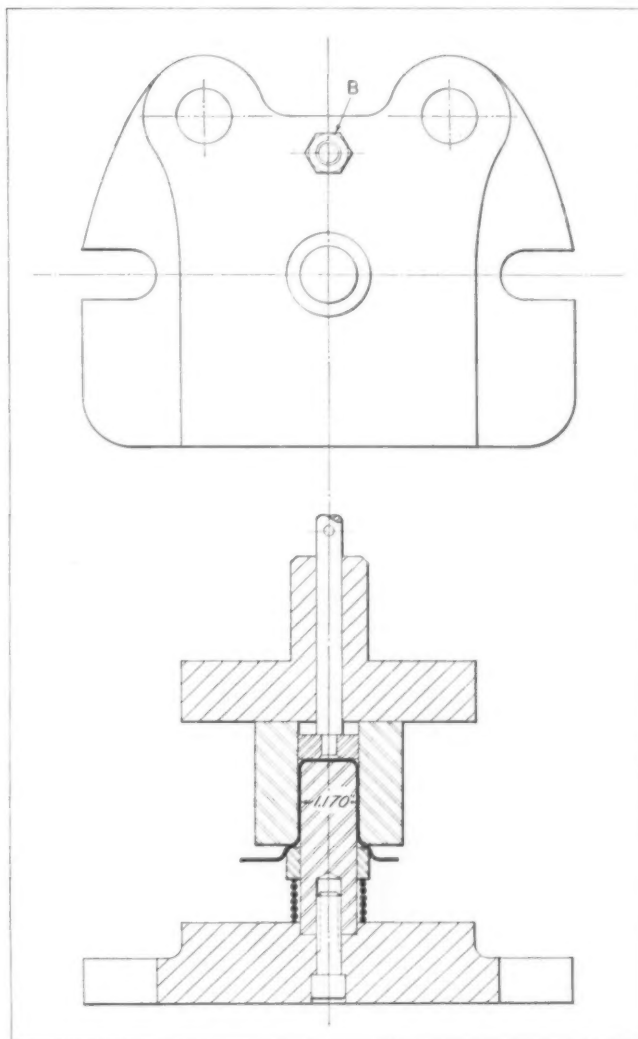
Die for Second Drawing Operation on Radiator Inlet Pipe
